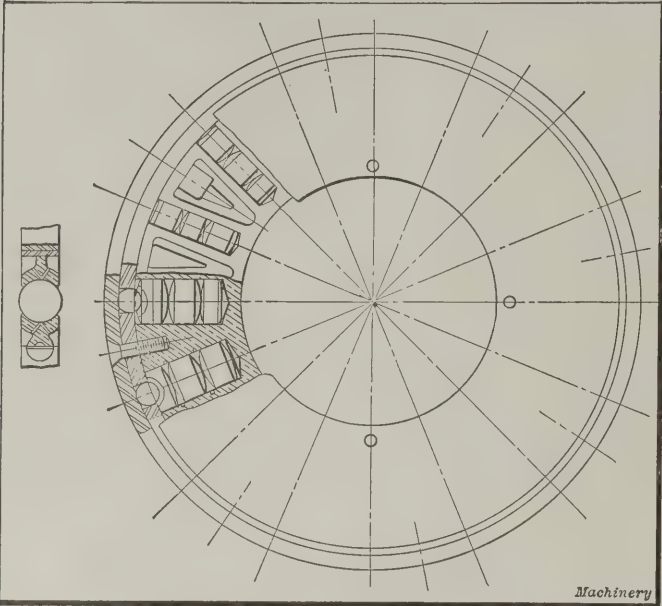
Means for Taking Care of End Thrust of Rollers in Roller Thrust Bearings
